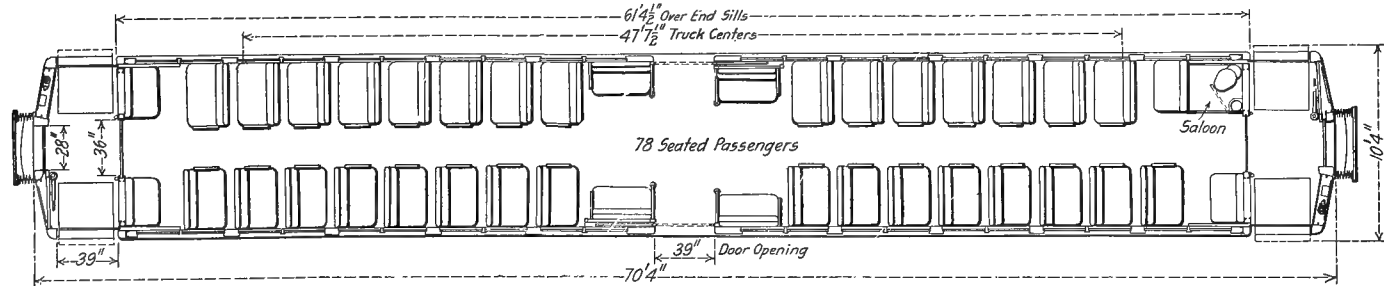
Floor Plan of New York, Westchester & Boston Suburban Car Shown in Fig. 184.
